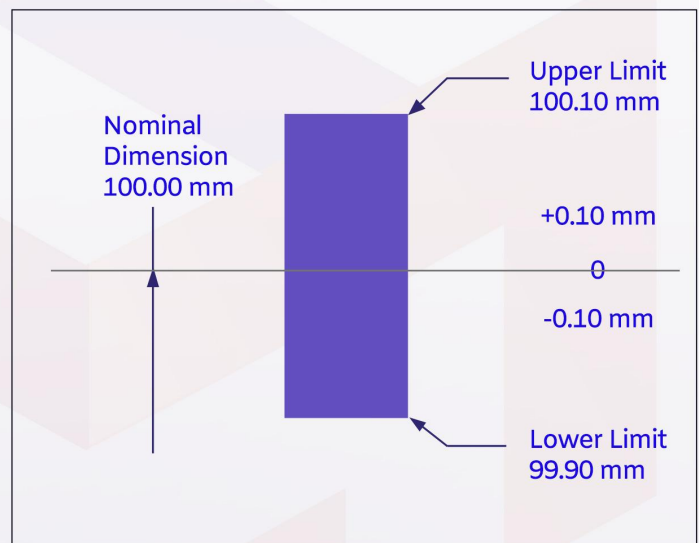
Tolerance Example: 100.00 ± 0.10 mm
